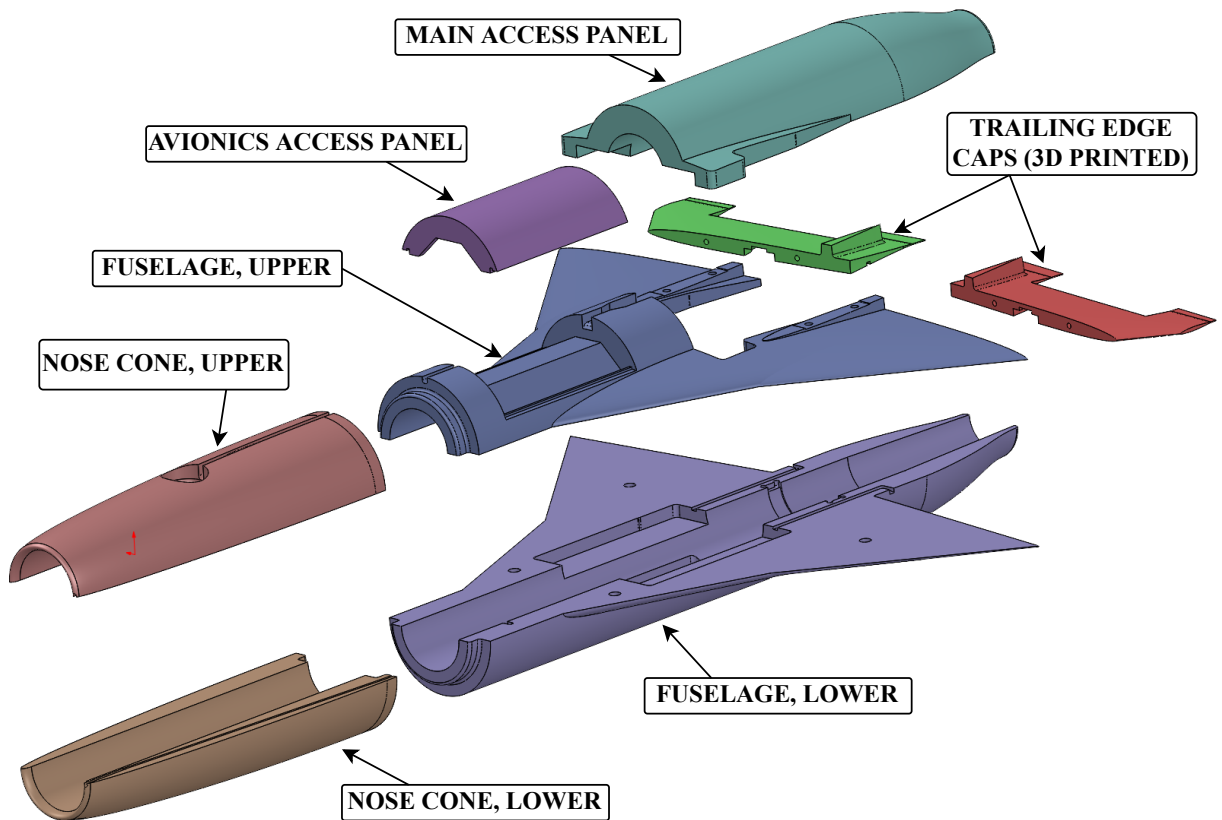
Exploded view of airframe components. All parts shown are EPS foam except where noted.
